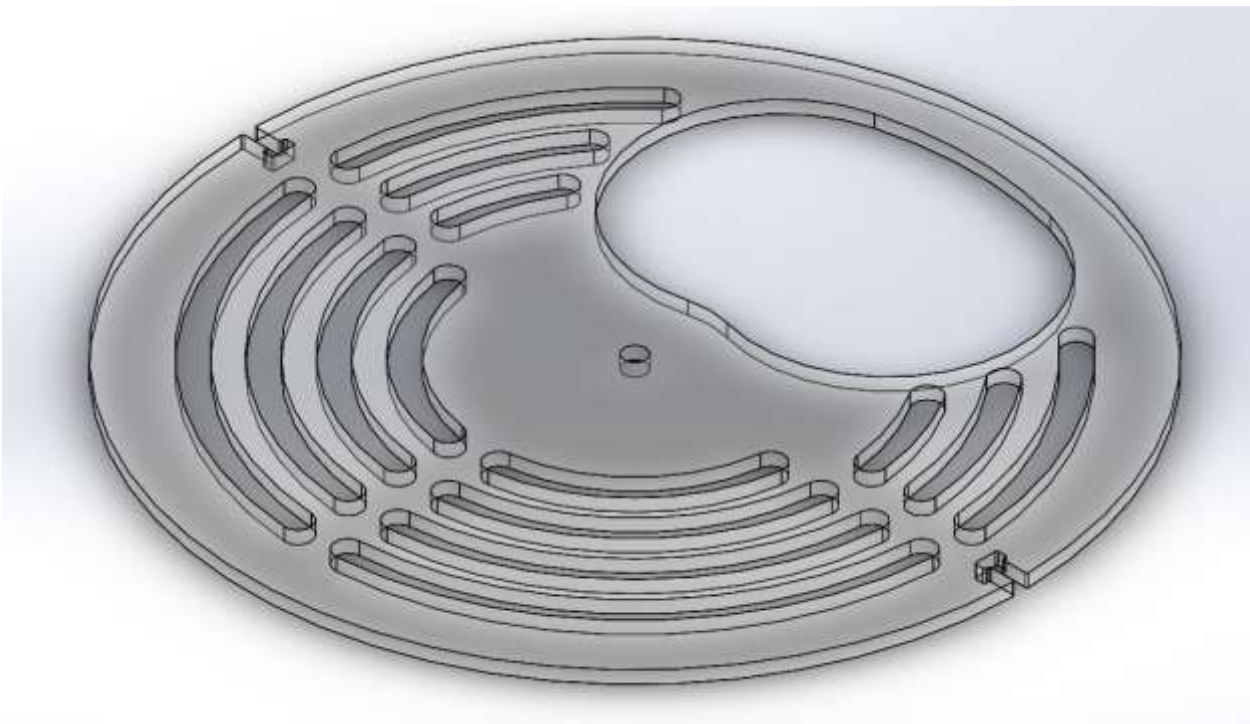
Second-layer plate, with drop hole leading to the first layer of the mechanism.
